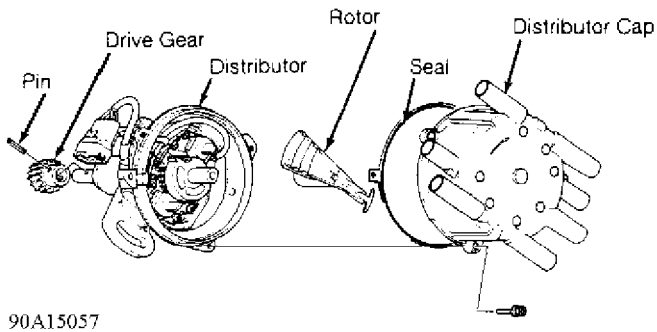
Exploded View Of Distributor (B2200 PFI, B2600i, MPV 2.6L, Protege & 323)
